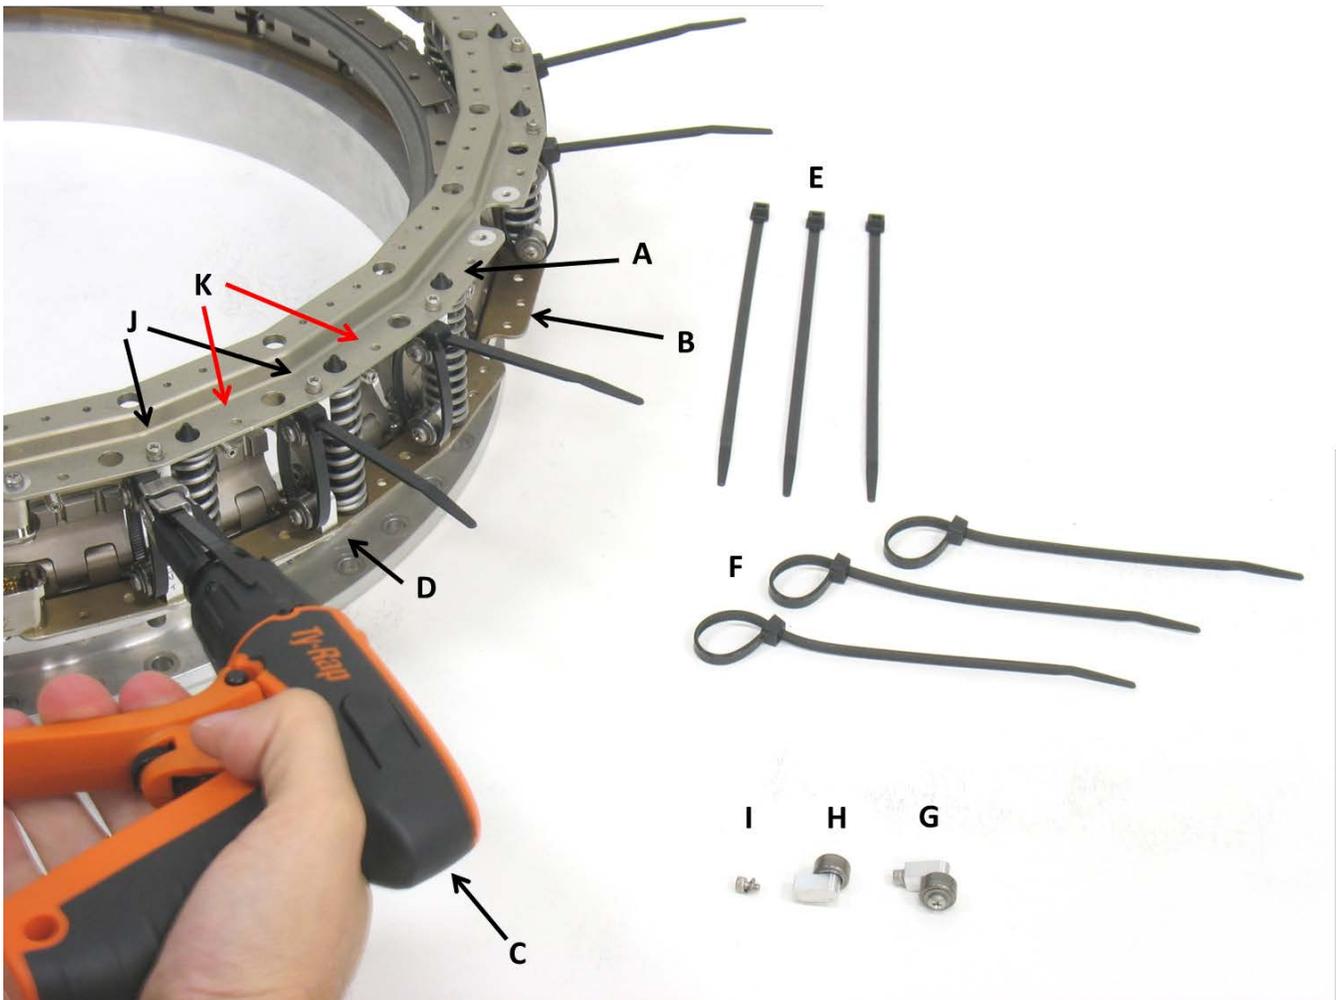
A: Lightband Upper Ring Flange, B: Lightband Lower Ring Flange, C: Ty-Rap ERG 50 Cable Tie Tool, D: LCT Pair with Cable Tie Installed, E: MS 3367-1-0 7" Nylon Cable Ties (Before Installation), F: Cable Ties (Removed After Stowing), G: Single LCT Assembly, H: Lower Assembly of LCT, I: Attachment Screw and Washer of LCT, J: Correct LCT attachment points, K: Incorrect LCT Attachment Points
